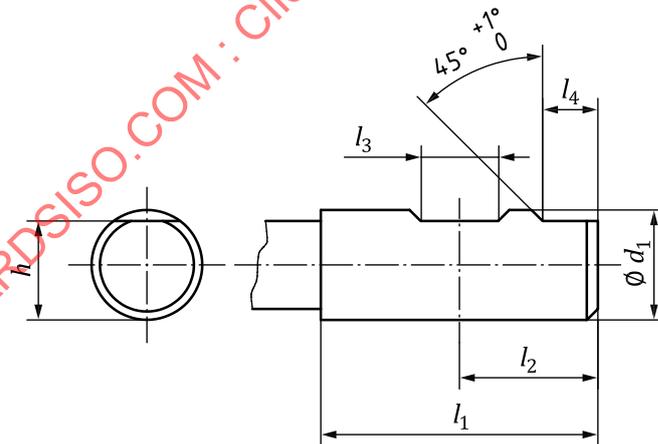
WE form — Flatted cylindrical shanks with double flat
